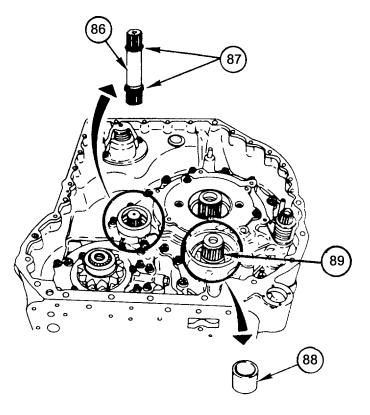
Inner (Left) Steer Shaft, Retaining Rings, and Spacer.
